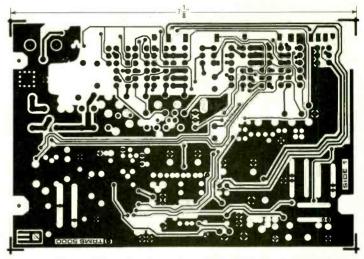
FOIL PATTERN for Side 1, the top surface of the main board. Pattern is approximately one-half size. Enlarge to 71/4 inches across.
